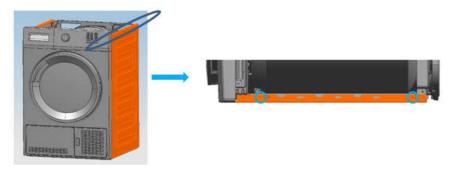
Screws between the side panel and side support bracket (Drum Side)
